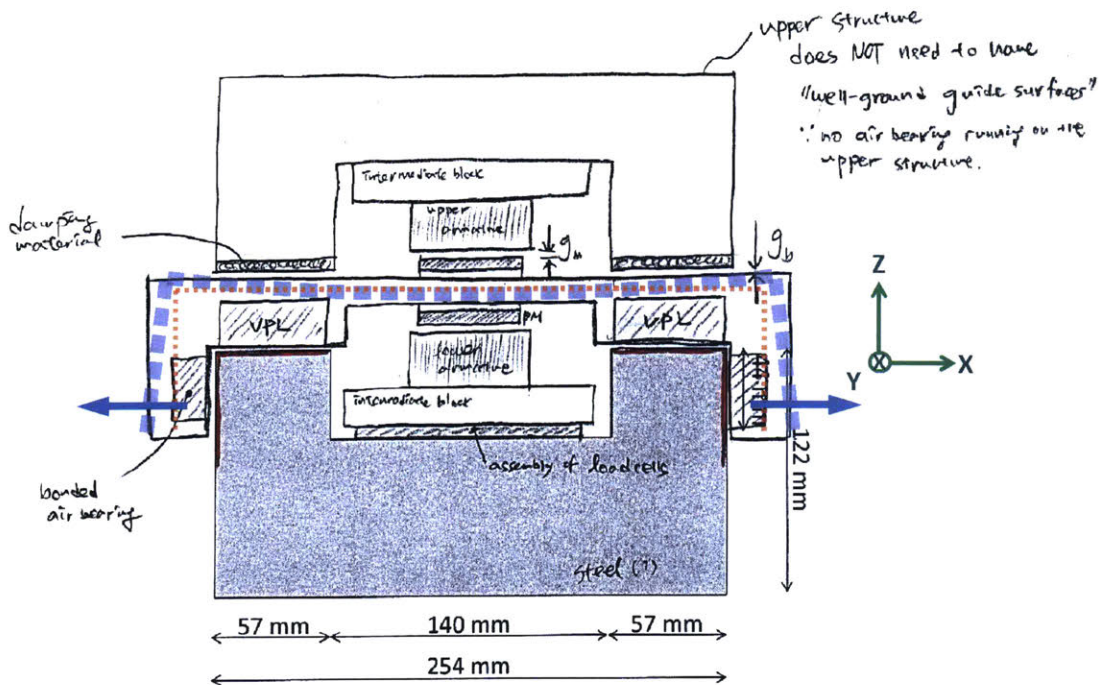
Hand sketch of a possible design with vacuum preloaded (VPL) air bearings.
